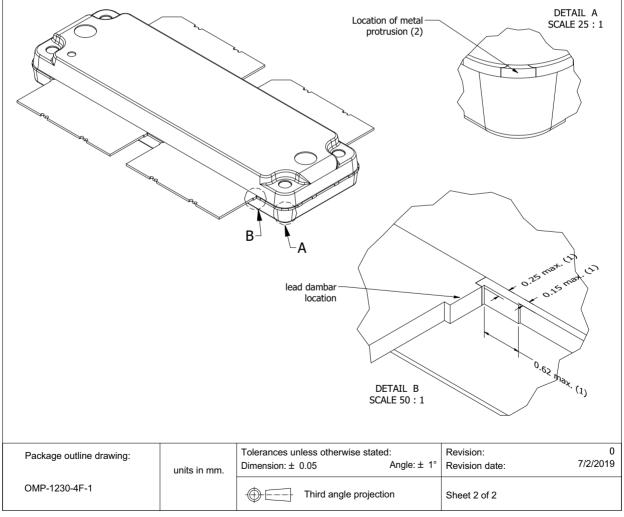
Package outline OMP-1230-4F-1 (sheet 2 of 2)
